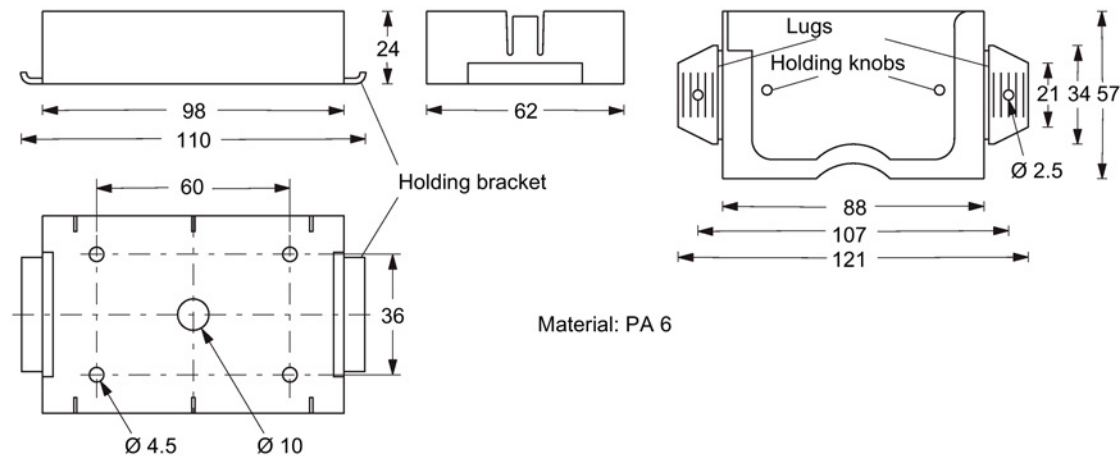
Dimension drawing of spacer 6GT2190-0AA00 with fixing pocket 6GT2190-0AB00
